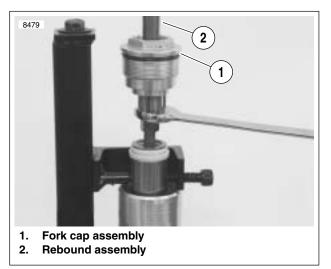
Rebound Assembly and Fork Cap Assembly
